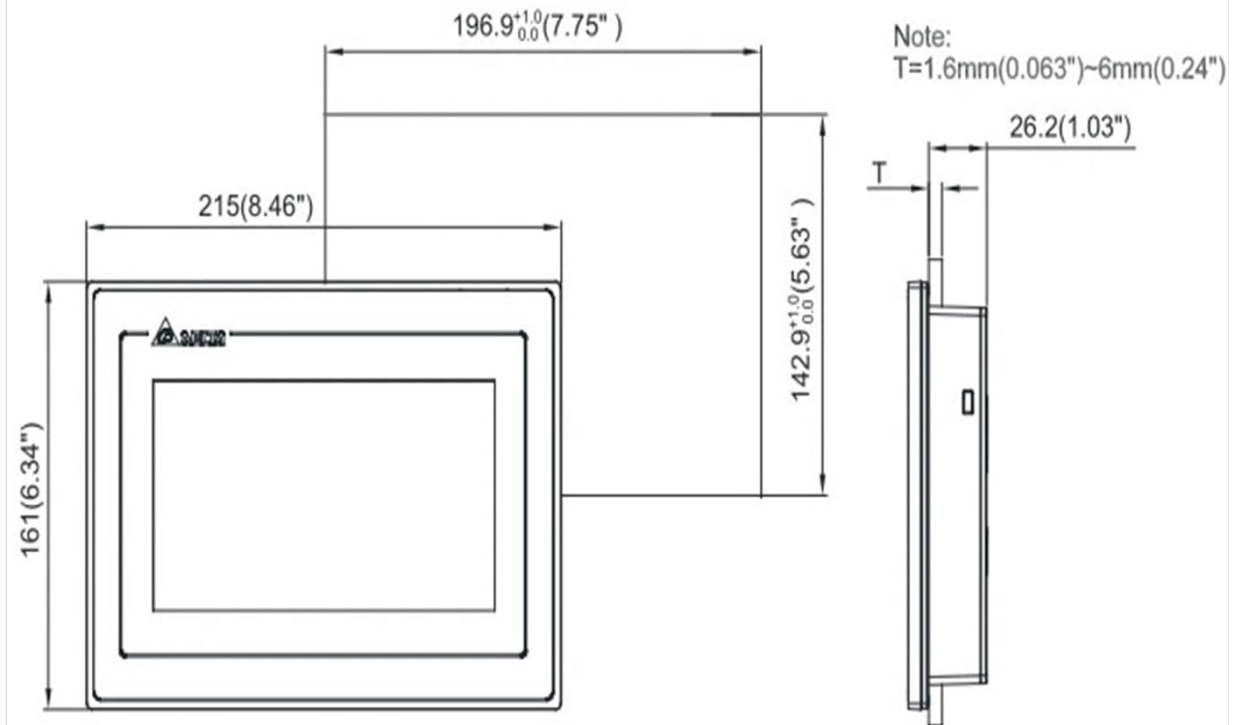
Dimensional drawing for panel cut-out and overall size. Note: Dimensions are in millimeters (inches).
